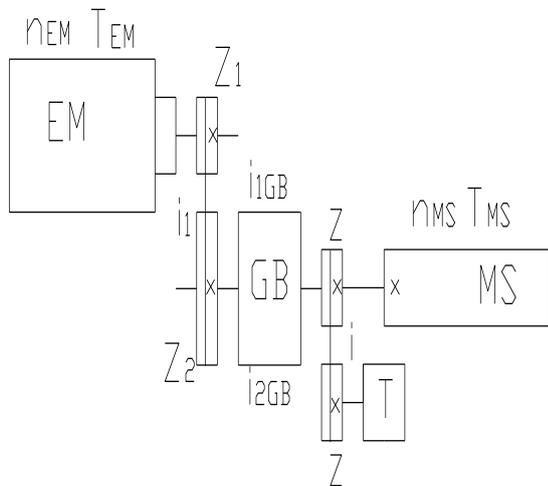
Kinematic scheme of the main kinematic chain with toothed belt transmission from electric motor to gear box
